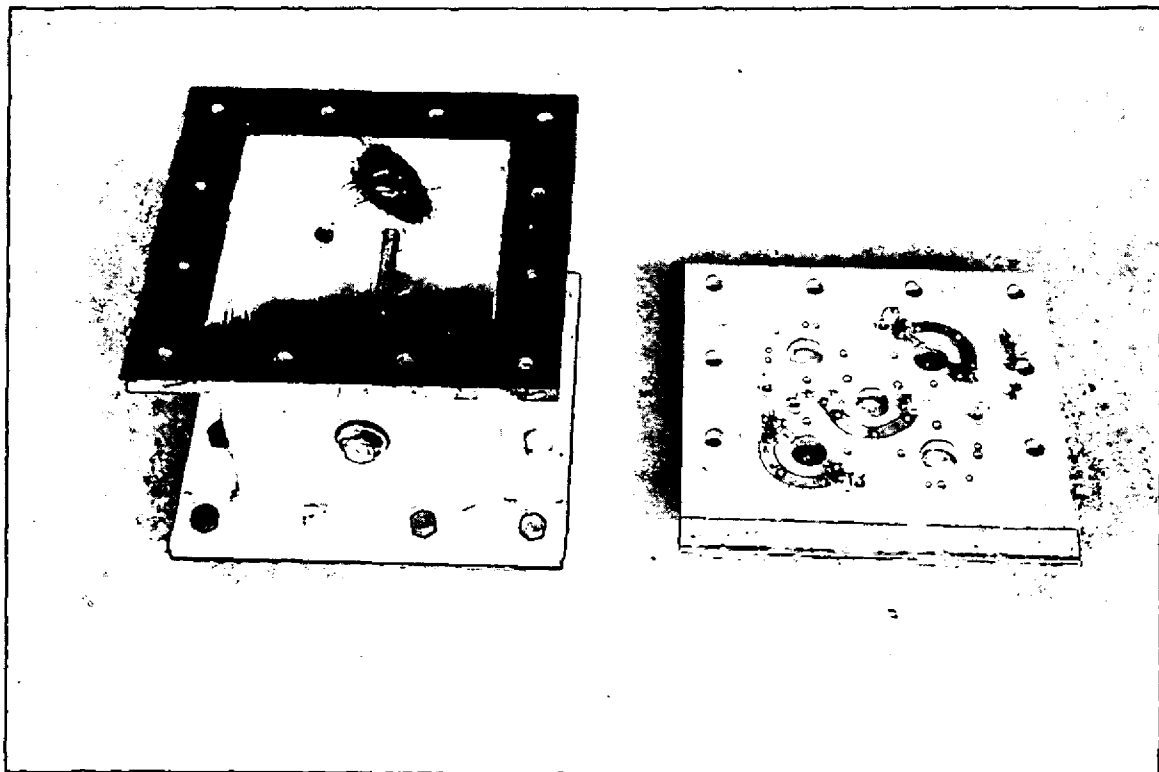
b) $\frac{1}{3}\text{ft}^3$ EXPLOSION VESSEL WITH THE COVER REMOVED
